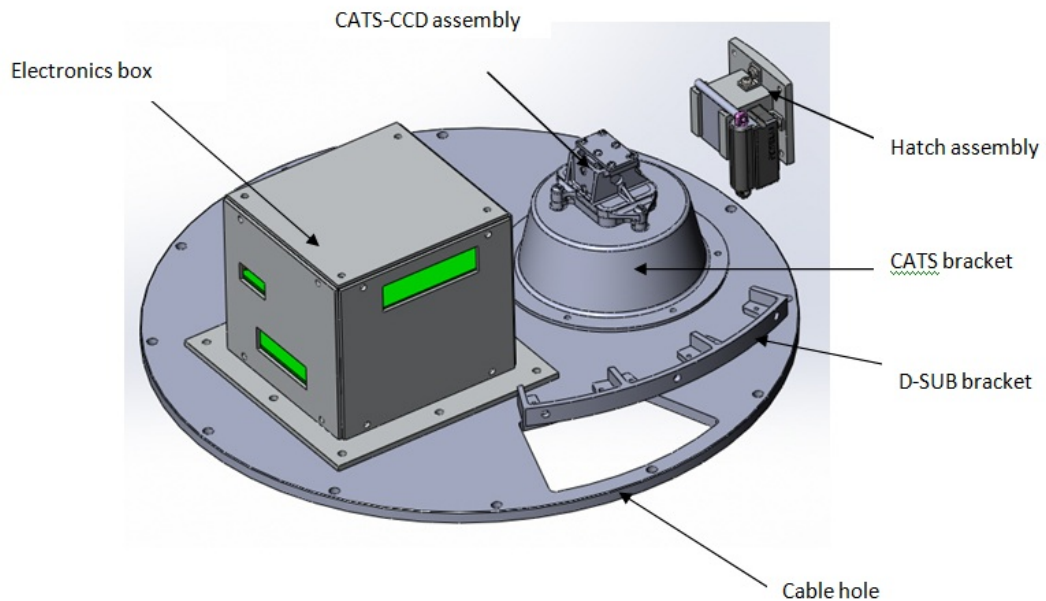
CAD image of PoleCATS experiment mounted on rocket payload bulk-head [81].
